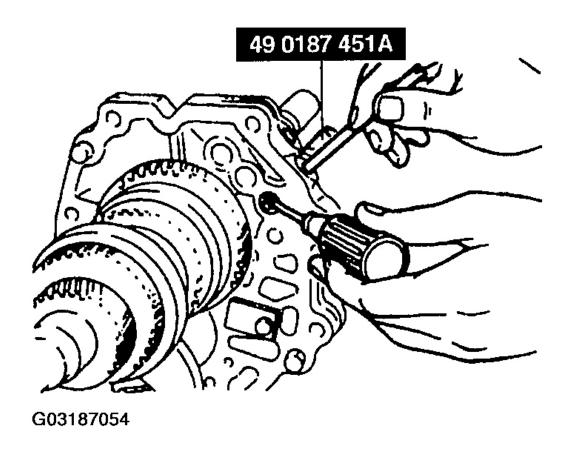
Installing Shift Rod Courtesy of MAZDA MOTORS CORP.
